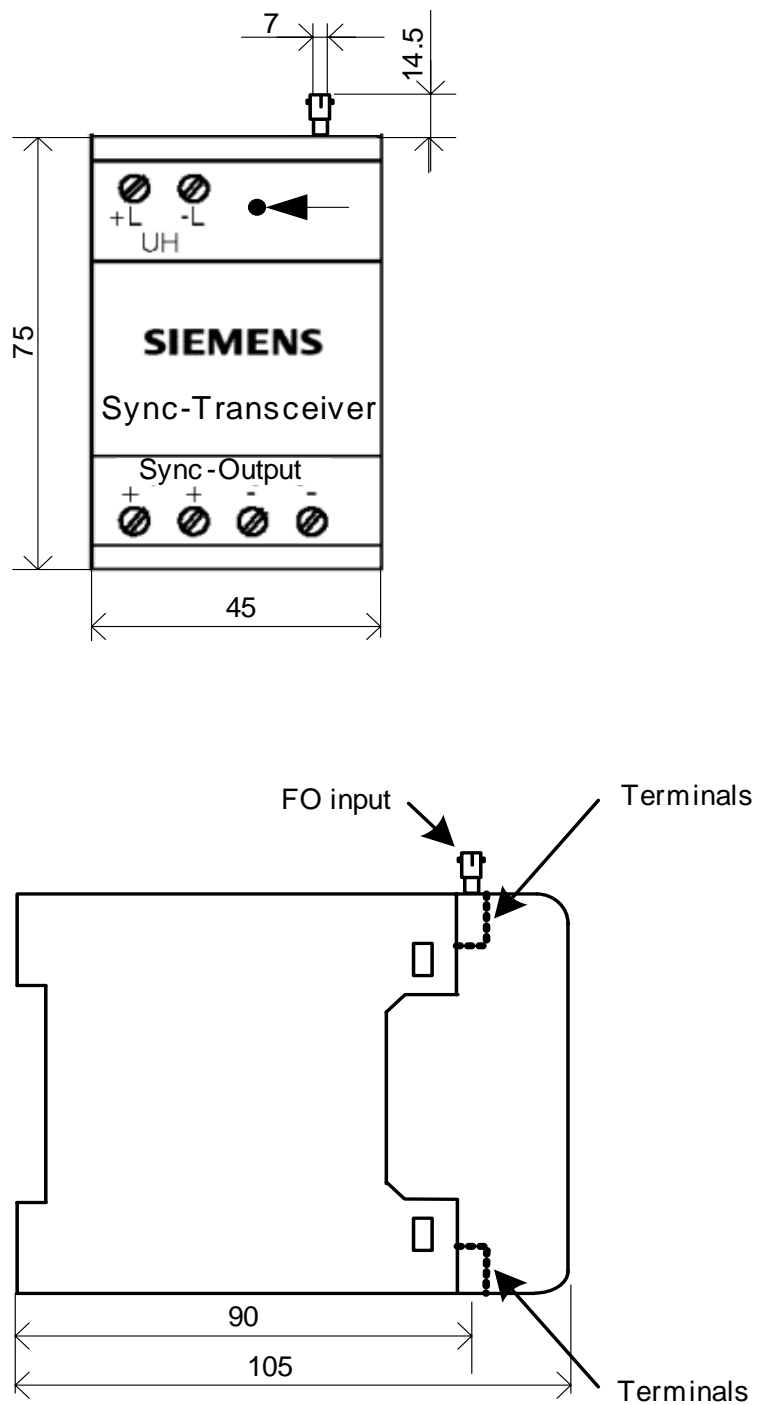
Dimension drawings of the Sync-Transceiver (all dimensions in mm)
